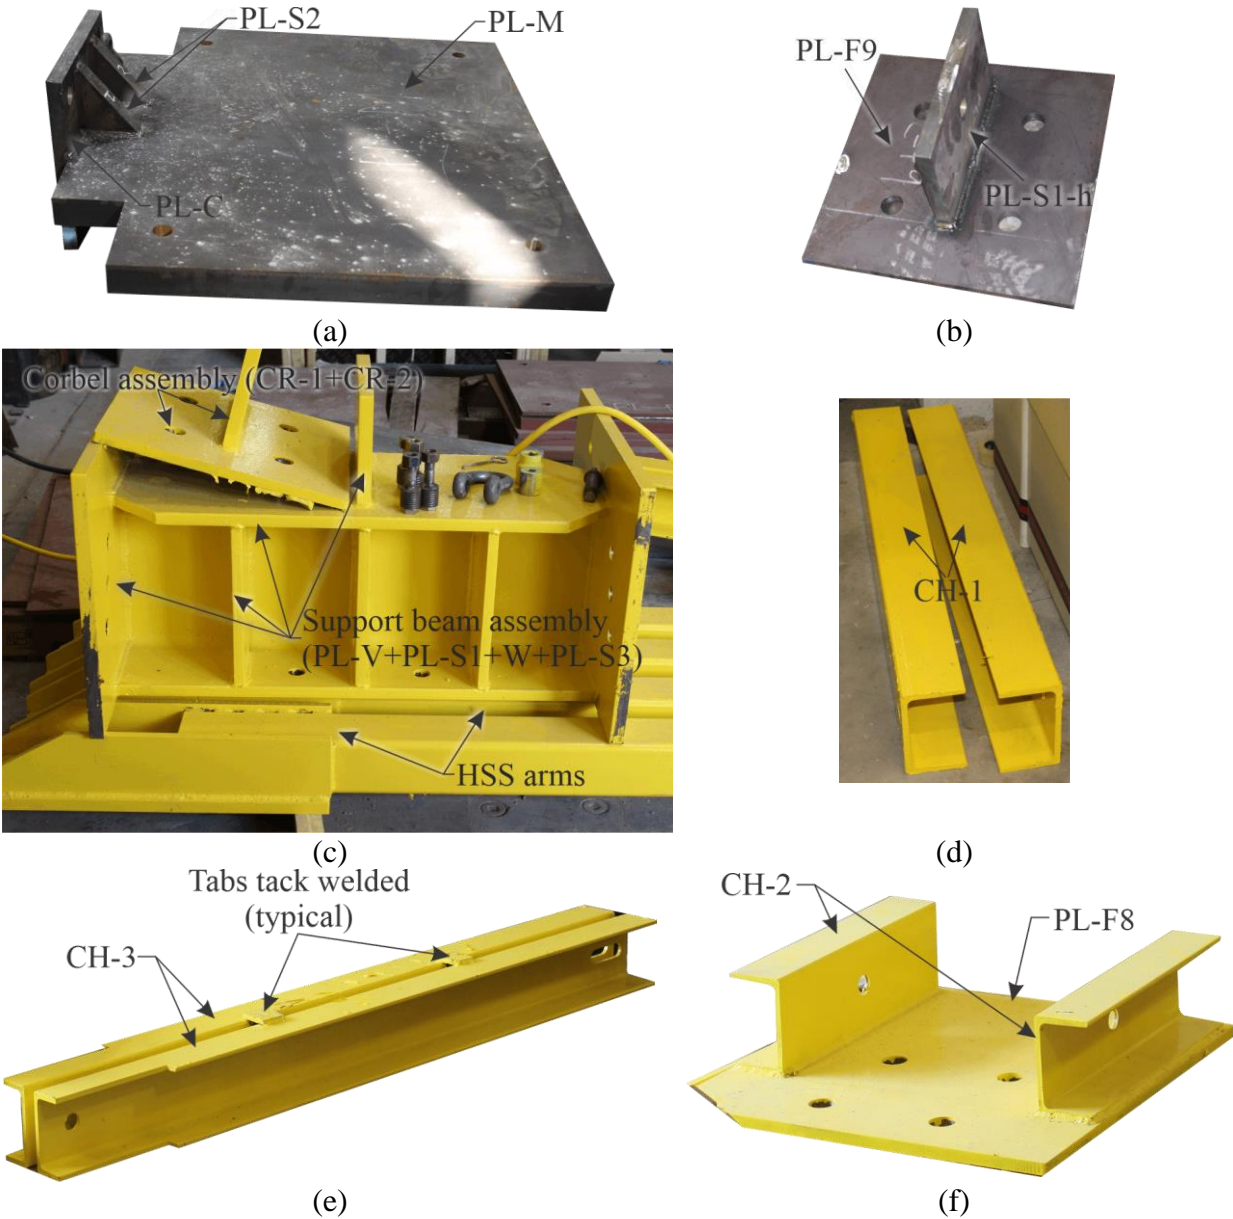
Test setup assemblies: (a) Parent middle plate assembly; (b) PL-F9 and PL-S1-h assembly; (c) HSS arms, support beam, and corbel assemblies; (d) CH-1 coated with paint; (e) CH-3 assembly; (f) CH-2 and PL-F8 assembly
